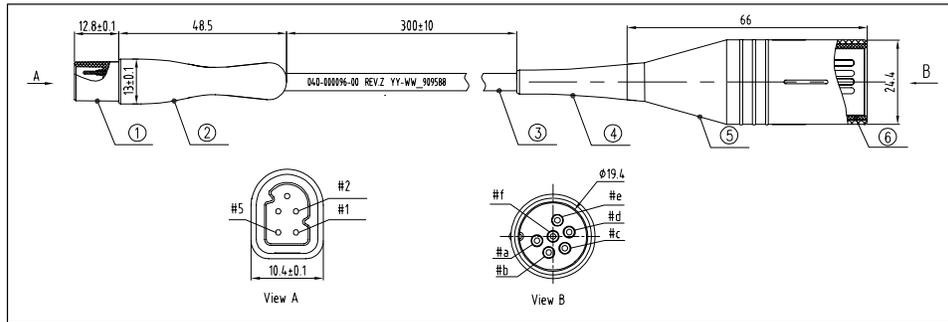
IBP Adapter Cable (5-pin to 6-pin)
